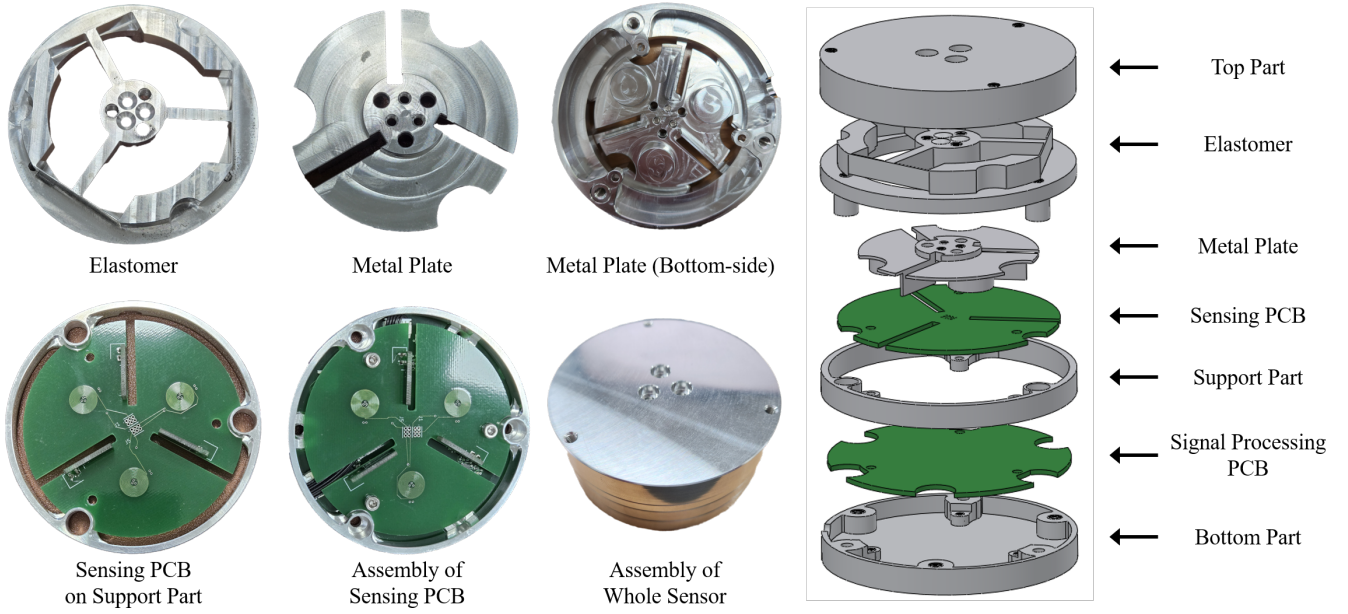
Components of the proposed sensor; Five metallic components: Top part, elastomer, metal plate, support part and bottom part, two PCB components: Sensing PCB and Signal Processing PCB.
